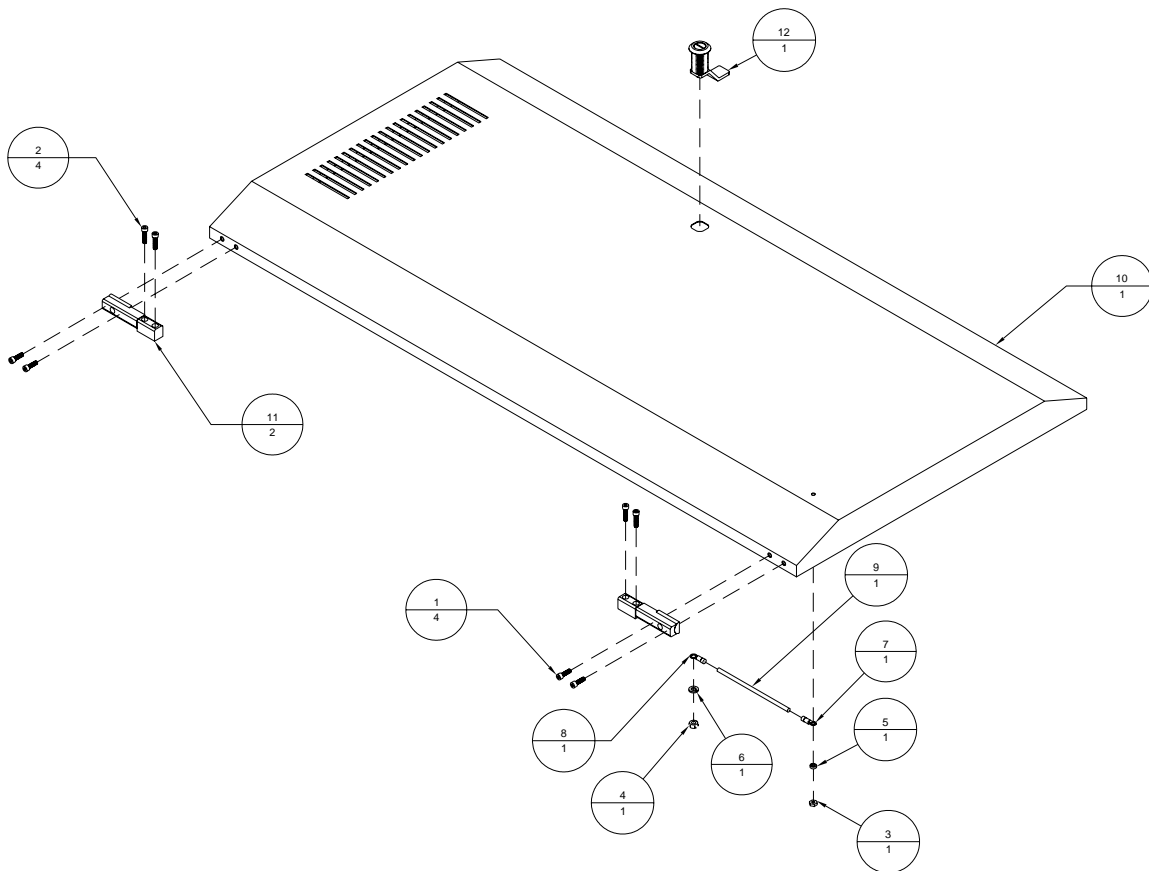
Side Door Assembly, Left, BK1700 (9103360A)
